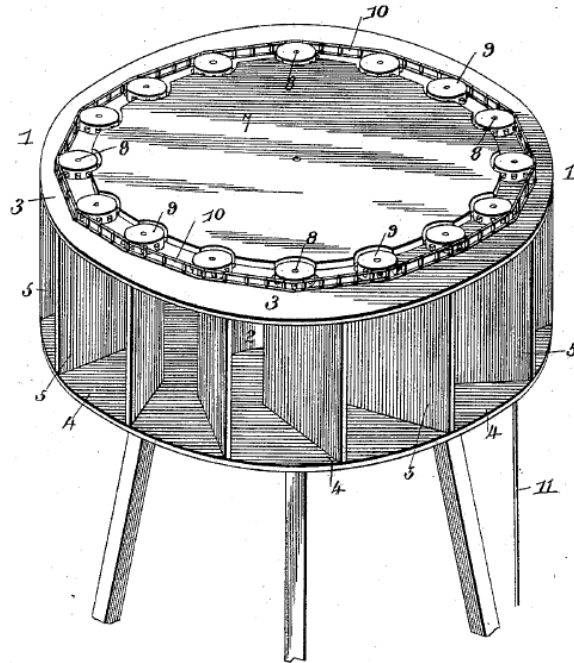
Isometric view of the Stevens & Jolly windmill (from: [10])
